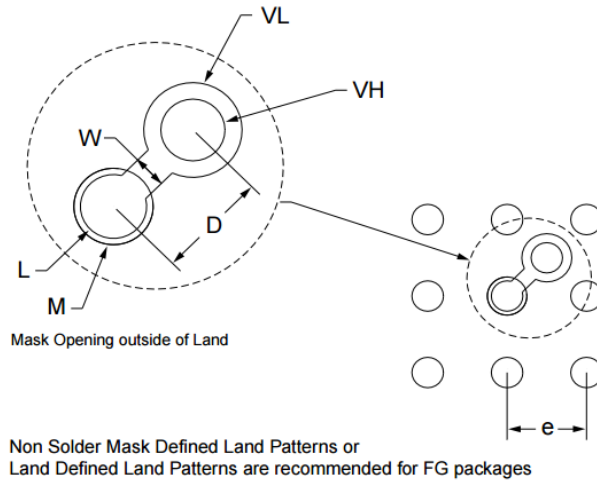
Suggested board layout of soldered pads for BGA, CSP and CCGA packages. [41]
